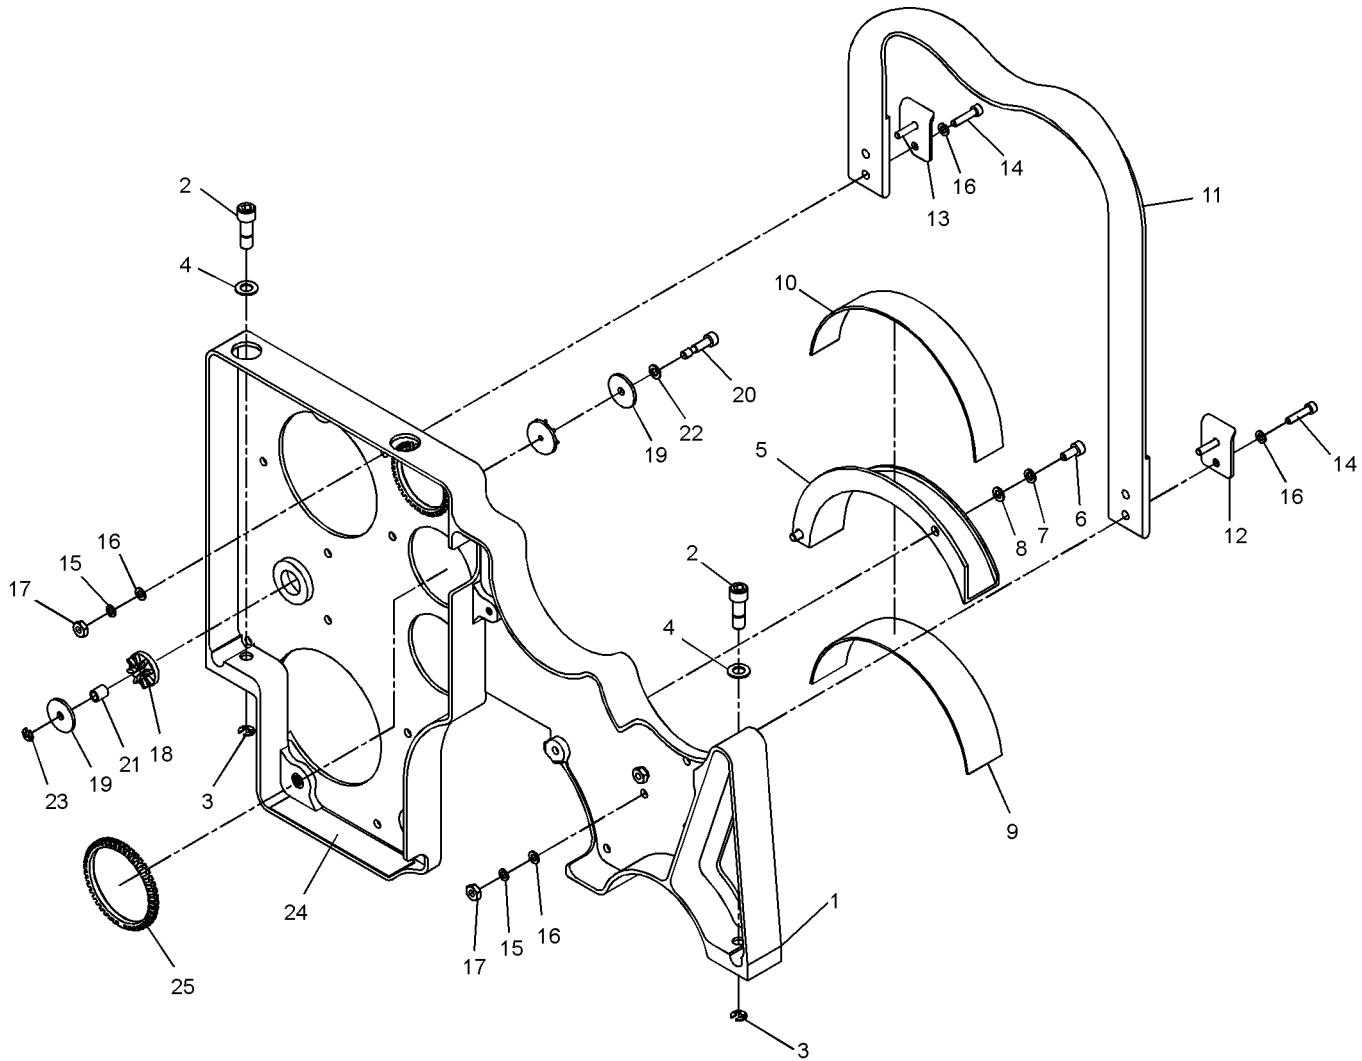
Bed Outlet Structure Assembly, P/N 1653714-1
